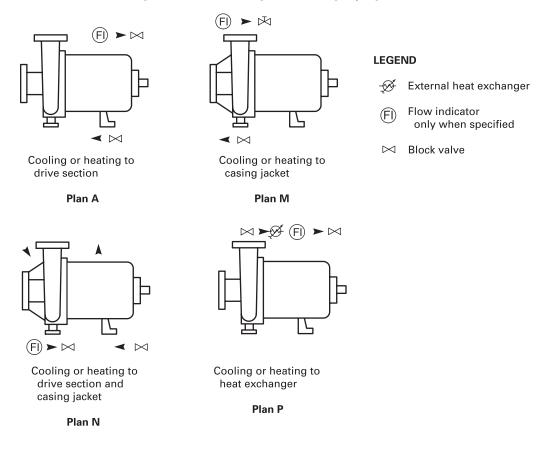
Cooling and Heating Piping Plans
